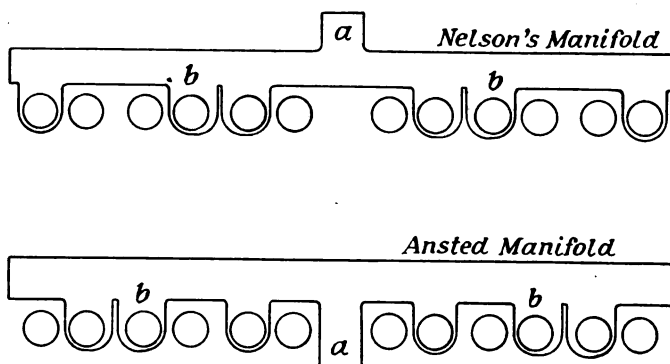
COMPARISON OF THE MANIFOLD SECTIONS OF TWO HIGH-SPEED ENGINES, SHOWING THE DIFFERENCE IN THE DISPOSITION OF THE CARBURETER AND VALVE PORTS
